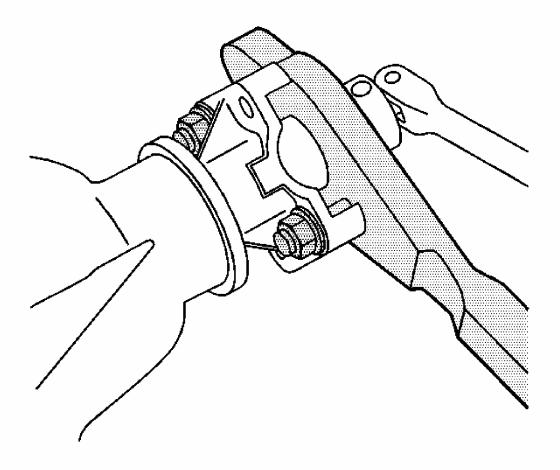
Holding Pinion Yoke With Special Tool Courtesy of GENERAL MOTORS CORP.
